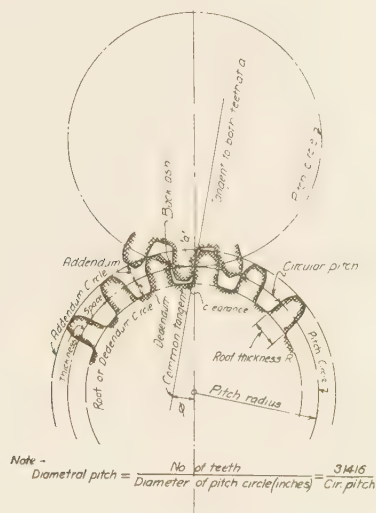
Principal dimensions and terms used for designating gear teeth.
